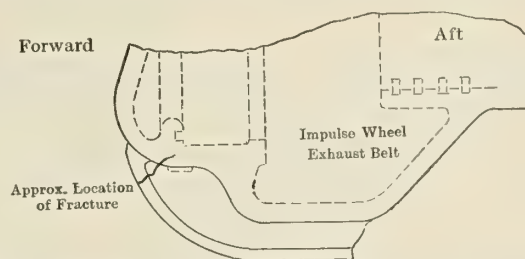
Approximate Side Elevation Showing Bulb Webs. Starboard H. P. Astern Cylinder, Lower Half
